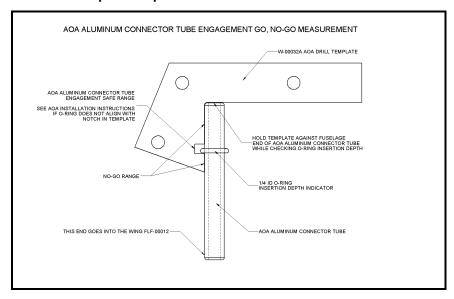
AOA Aluminum Connector Tube engagement measurement.
